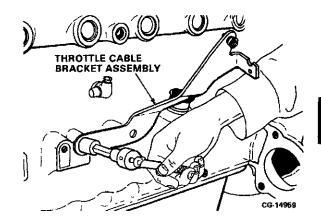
Remove the Throttle Cable Bracket Assembly
